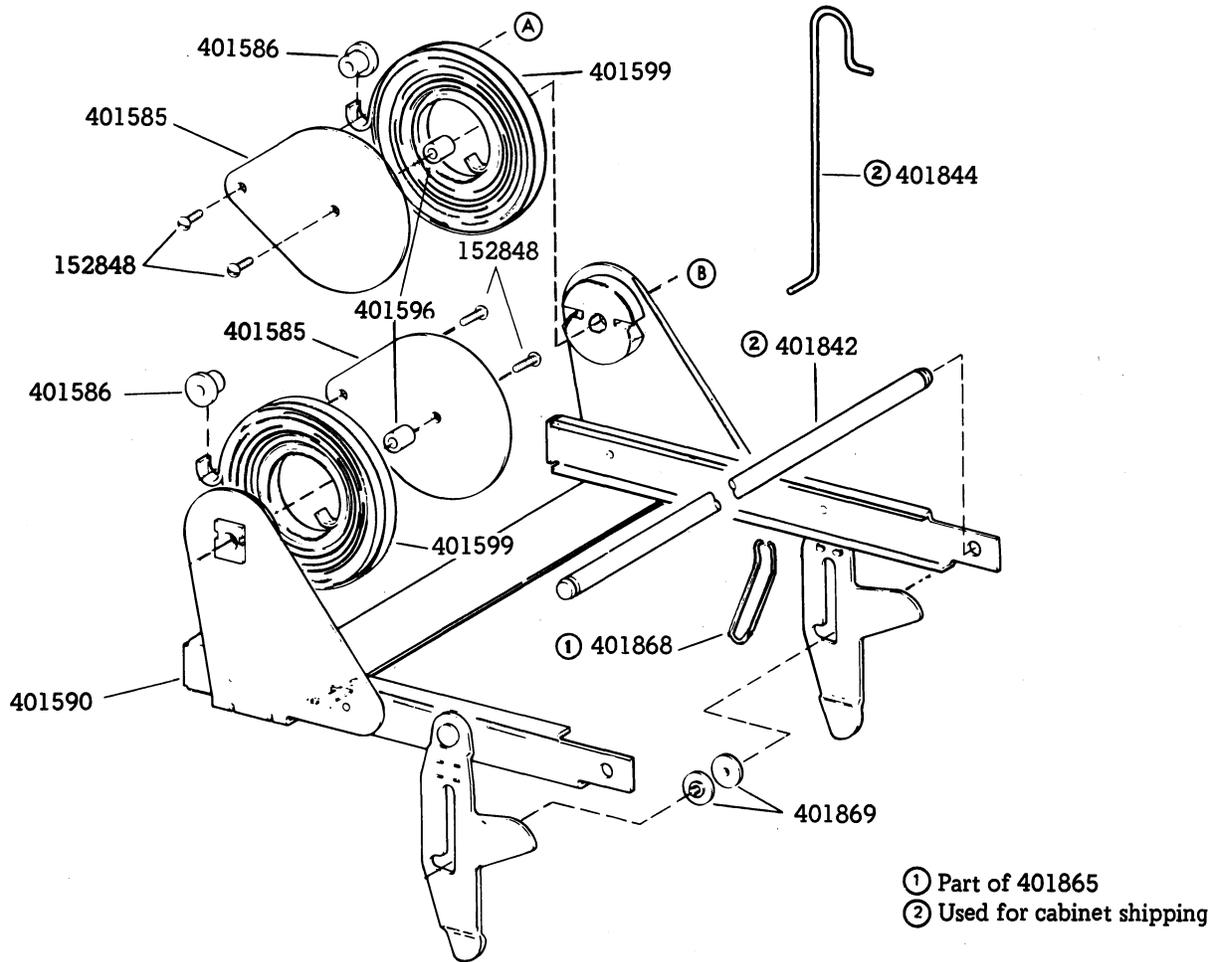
Early Design Printer Mounting Cradle for Adjacent or RO Friction Feed Printer
